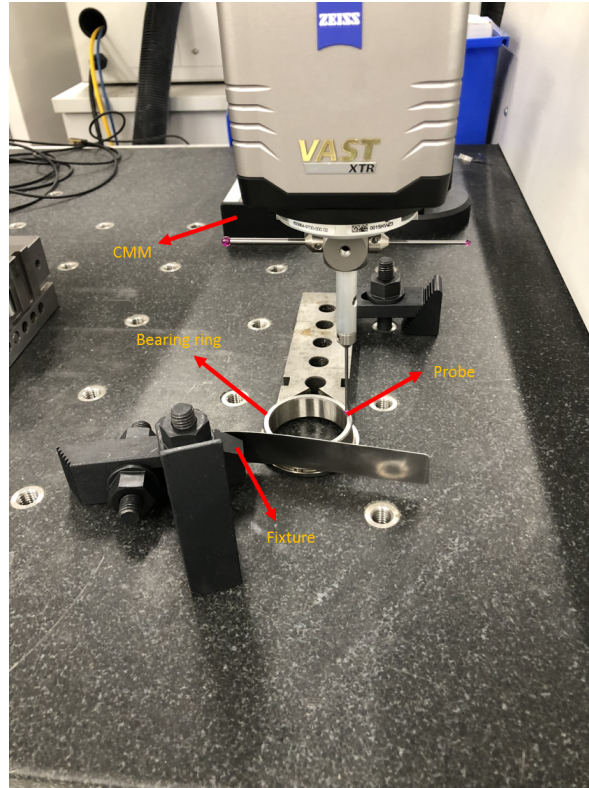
CMM fixture for measuring surface flatness and parallelism.
